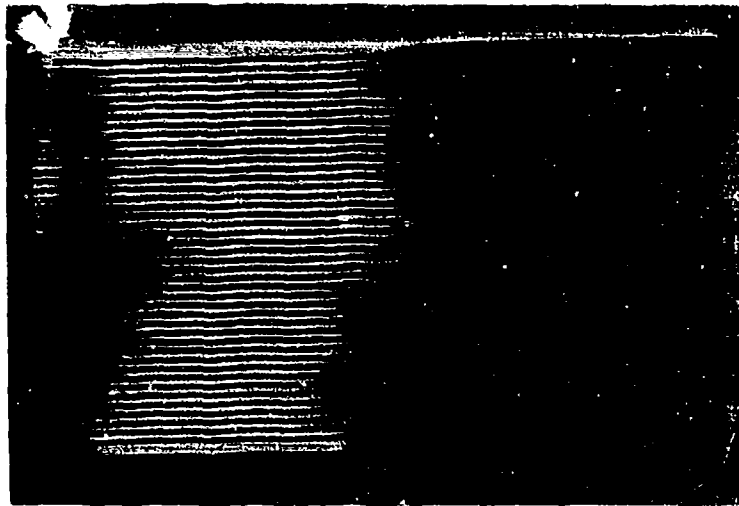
TEST SPECIMEN No. 1-COOLING CHANNELS PRIOR TO BONDING OF COVER SHEET
